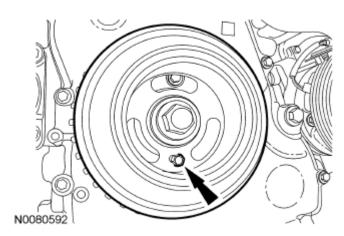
Locating Crankshaft Pulley Hole Bolt (6 mm x 18 mm) Courtesy of FORD MOTOR CO.
